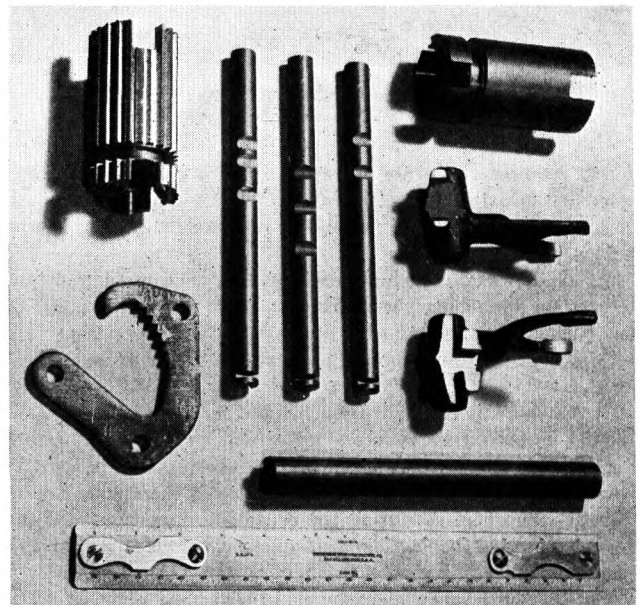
VARIOUS COLD-ROLLED-STEEL, CAST-IRON, AND ALLOY-STEEL PARTS BEING FINISHED BY SURFACE BROACHING
